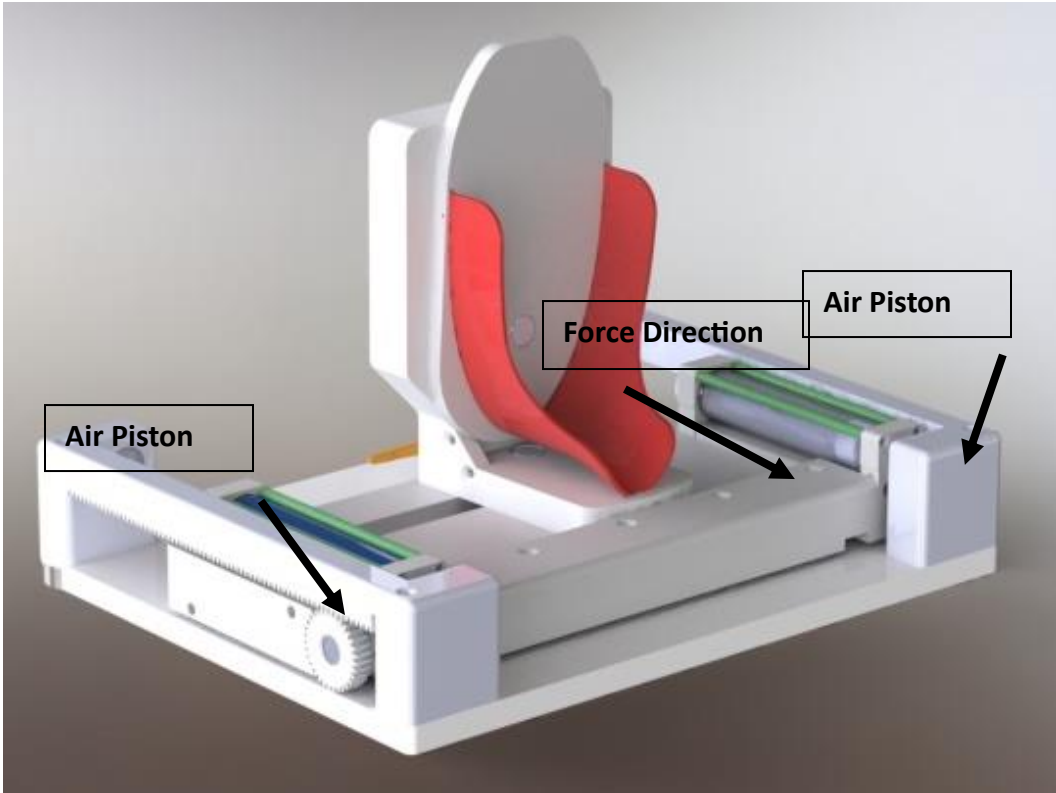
Illustration of the loading platform identifying the air driven pistons that apply superiorly directed force to mimic weight bearing.
